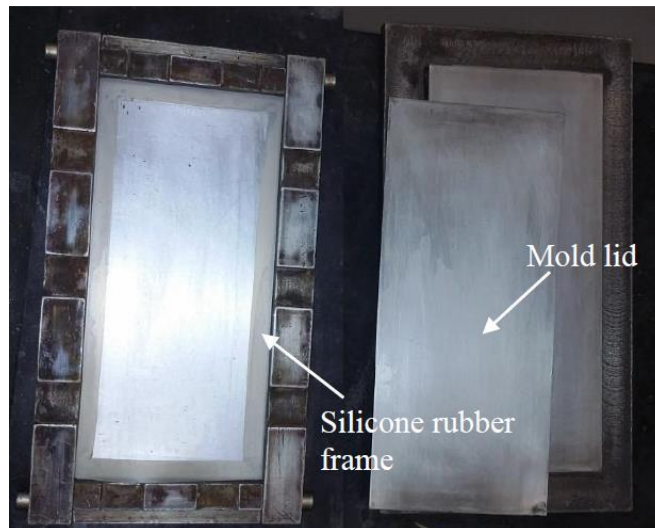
Mould for producing the bulk specimens with steel plates and silicone rubber frame.
